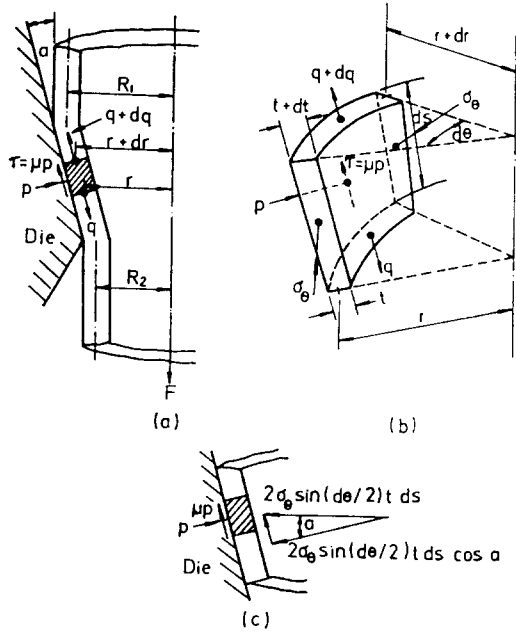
Figures of tube drawing, (a) tube drawing through a conical die; (b) stress acting on an element of the tube; (c) component of the radial force due to the circumferential stress σ_θ .
